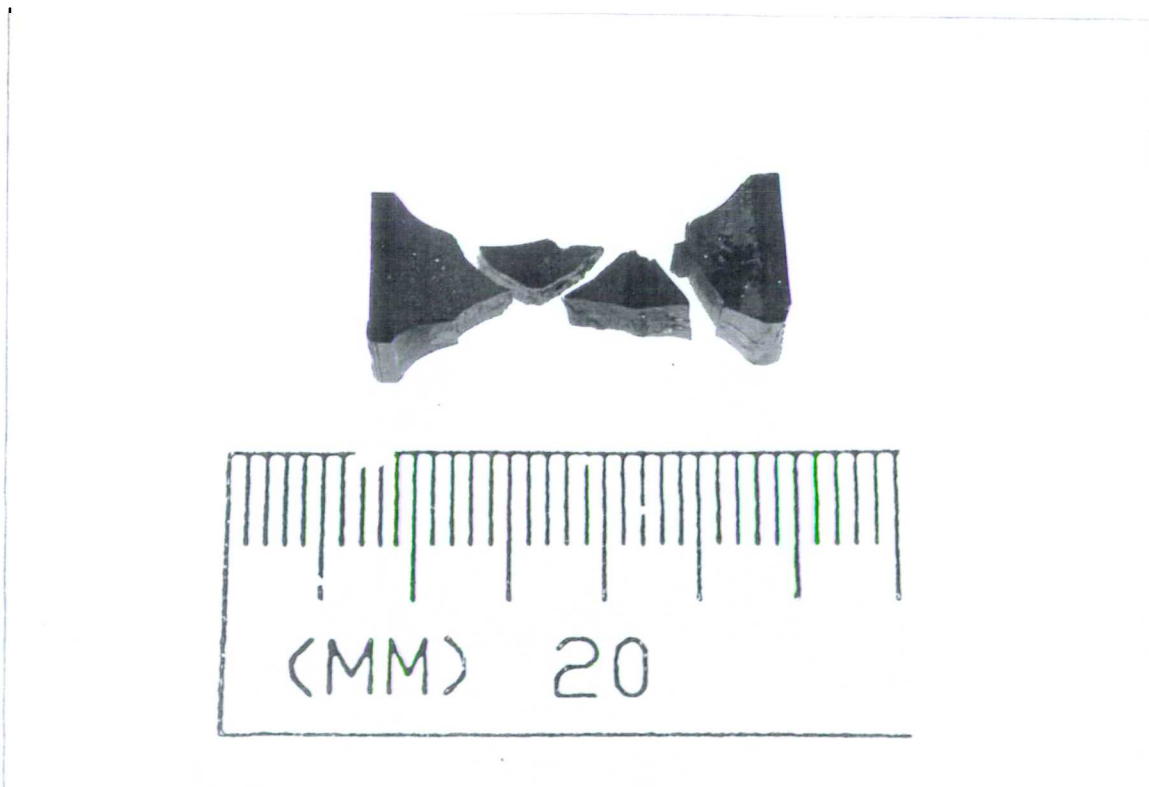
Typical fractured CW specimen (reconstituted)
